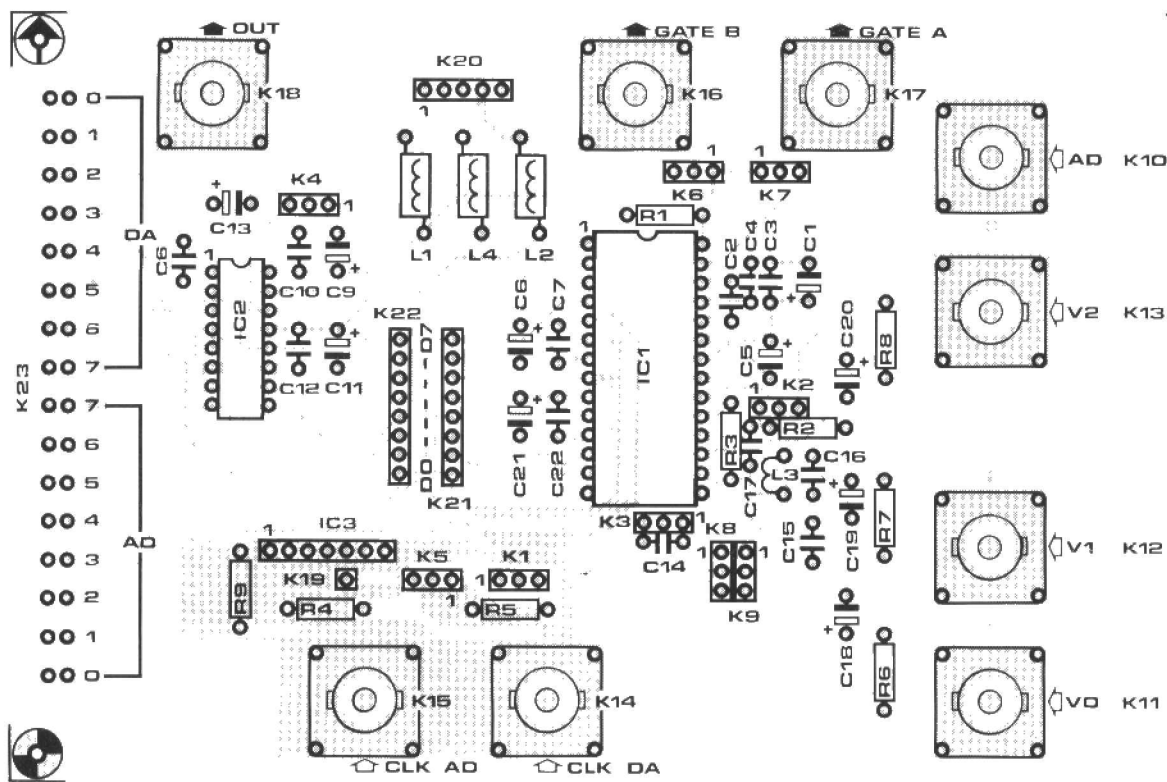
Component mounting plan of the double-sided printed circuit board. Note that the board is designed for PCB-mount BNC sockets.
